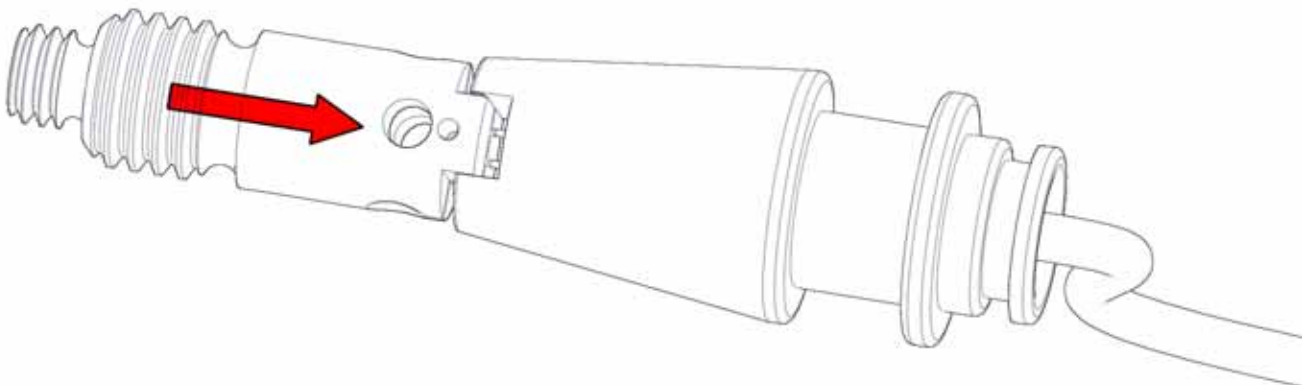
Sliding the threaded PEEK stud into the release housing.
